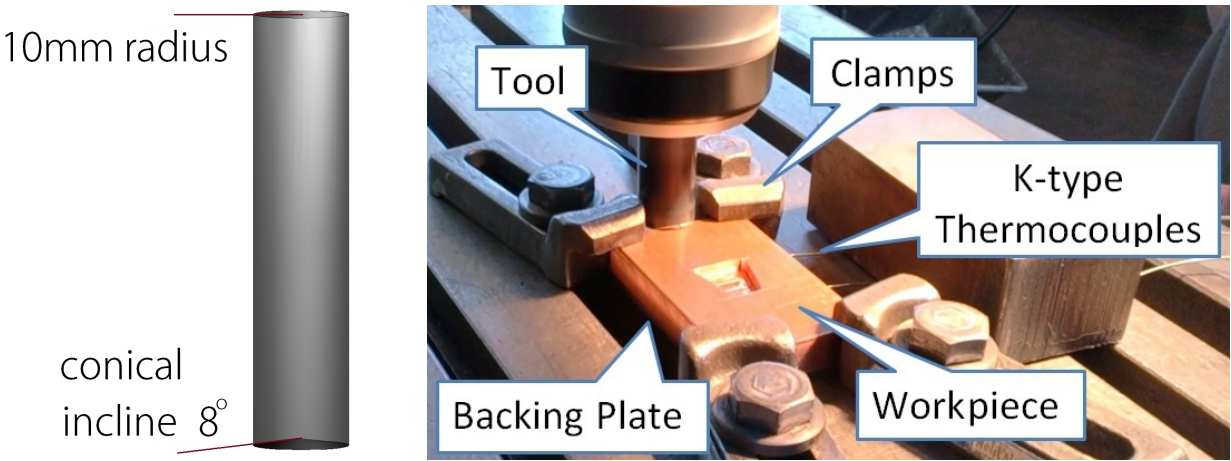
Left) tool dimensions, right) experimental set-up.
